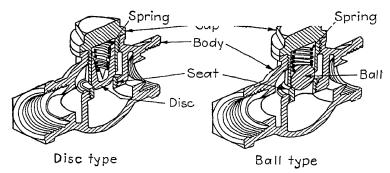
Types of check valves. (Courtesy of Eastern Air Lines, Inc.)
